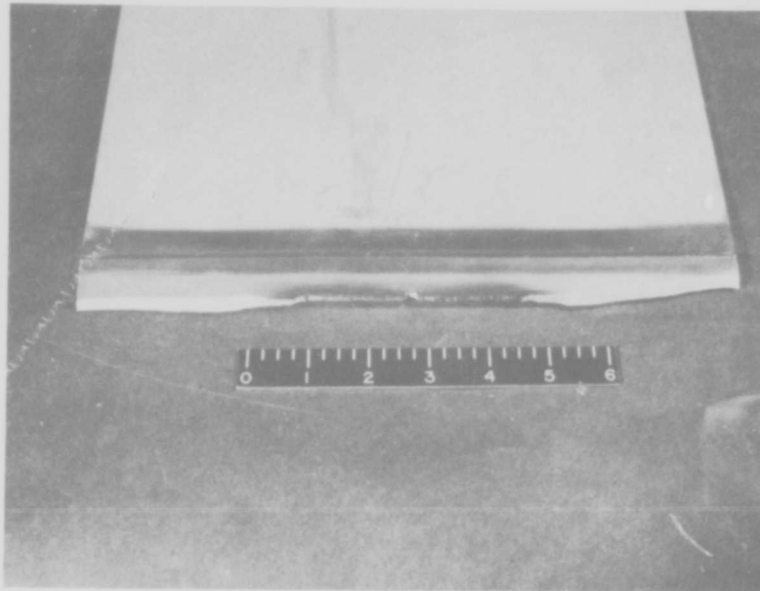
12- BY 36-IN. CENTER-NOTCHED PANEL FABRICATED BY ELECTRON BEAM WELDING
